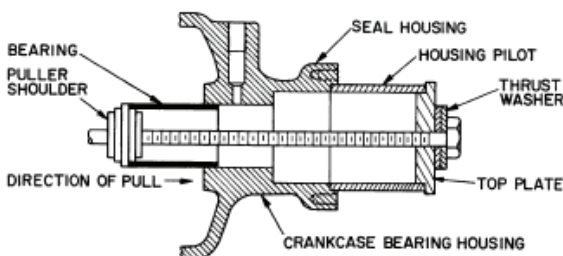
Seal-End Main Bearing (5F40, 60)
